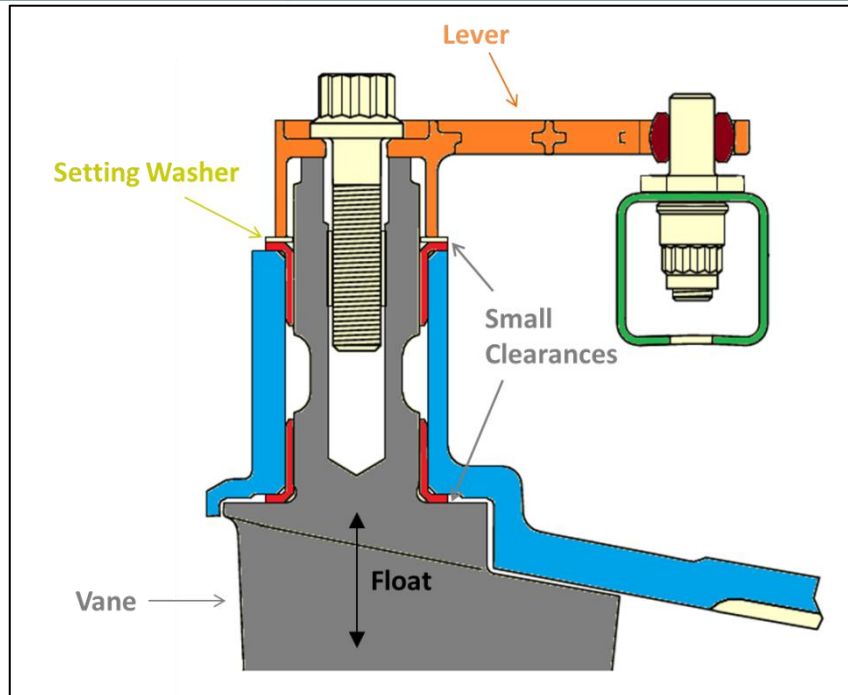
Clearance between Vanes and Compressor Casing (*Engine Manufacturer*)
